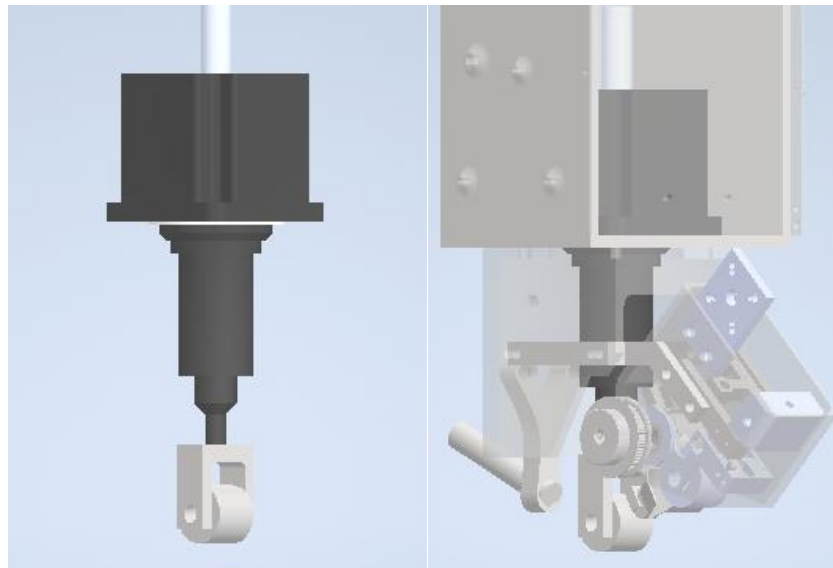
Attachment of roller assembly onto stepper motor isolated (left) and in the assembly (right). The roller used in this work was a 31.8 mm (1.25") diameter, steel roller with two internal plain bearings. Through the center of the roller is a hollow shaft that accepts two 40W cartridge heaters. Initially, the temperature of the roller was monitored by the same DF Robot SEN 0256 IR thermometer and controlled by the same Arduino Uno Rev3 used previously. Eventually, the IR thermometer was switched to an Optris CSLT as this sensor had a higher upper sensing temperature of 1030C vs. 270C for the DF Robot, further it had a programmable sensing emissivity, and could interfaced as either a digital or K-type thermocouple. The last feature was not used in this current work but does provide an easy path for
